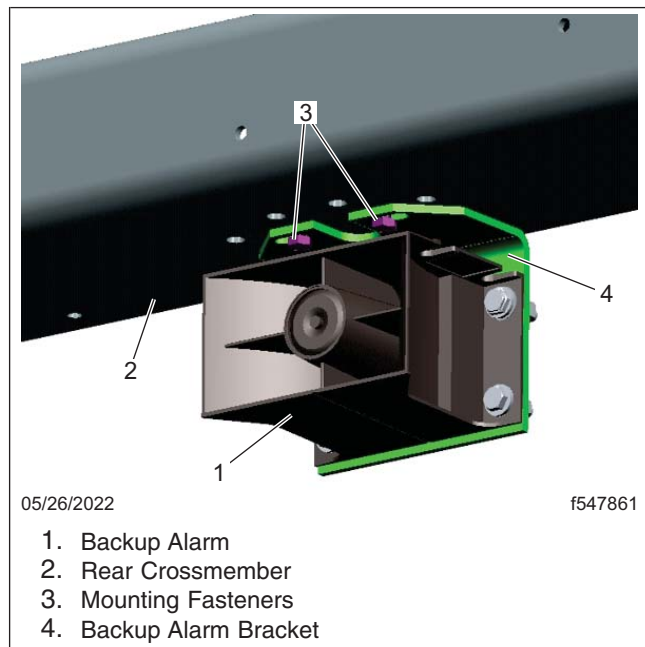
, Mounting the Backup Alarm Bracket to the Rear Crossmember
